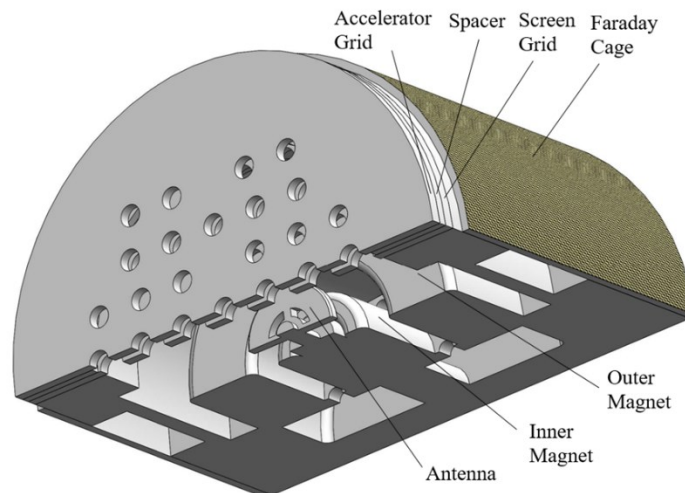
Cross-section view of latest MMIT prototype<sup>27</sup>
